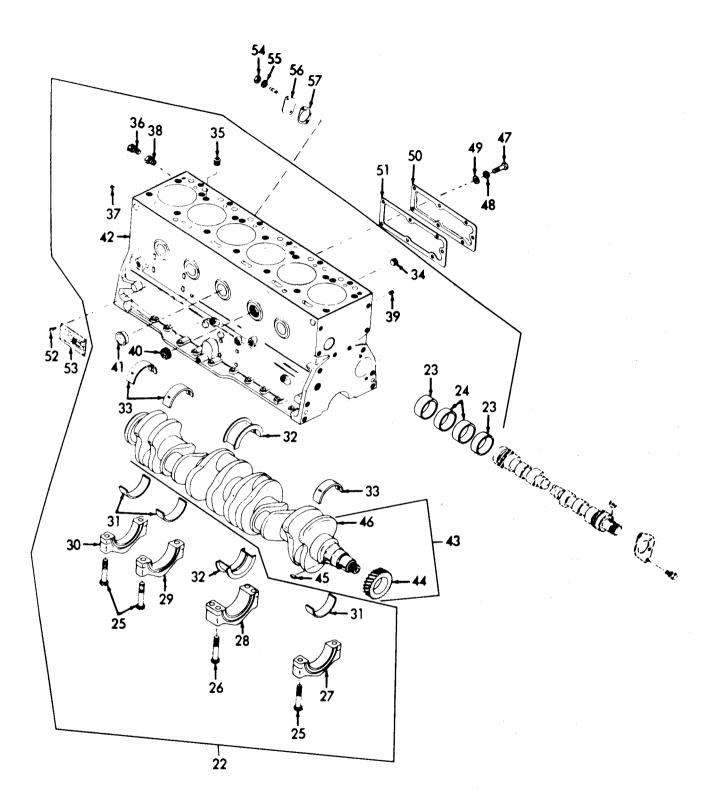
Cylinder Block Assembly (Sheet 2 of 2).
